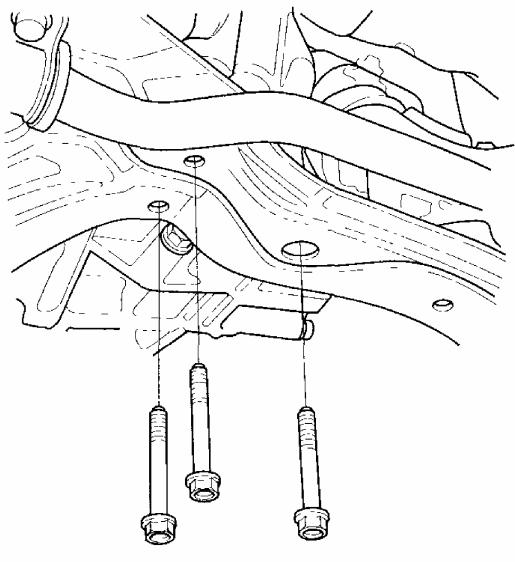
Removing Bolt Front Engine Mount Bracket Courtesy of AMERICAN HONDA MOTOR CO., INC.
